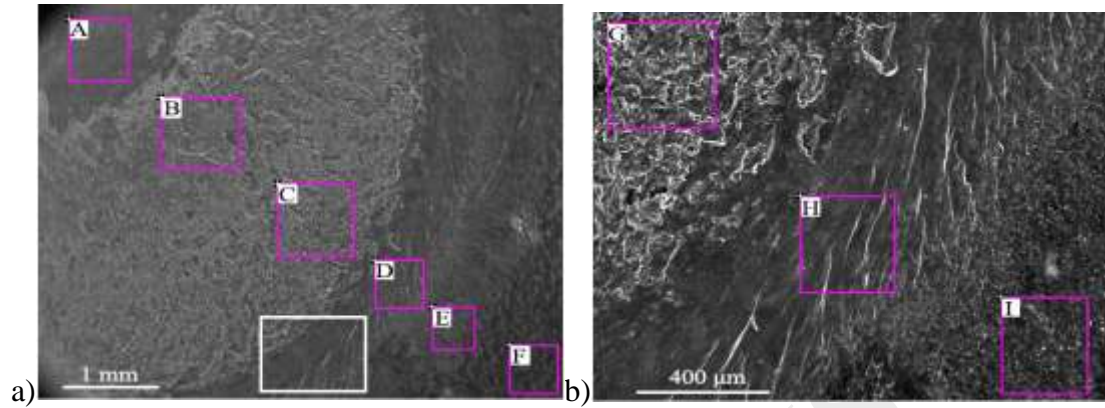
Fracture surface of the Al5754/AlSi coated steel weld: (a) overall and (b) magnified view in the white rectangle in a (0.9 mm penetration, 1.42 kN).
